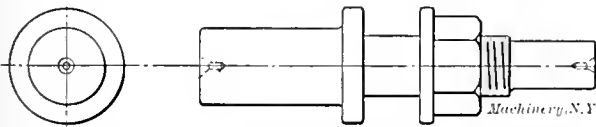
Arbor for Cutting Concave Knurls in the Milling Machine
